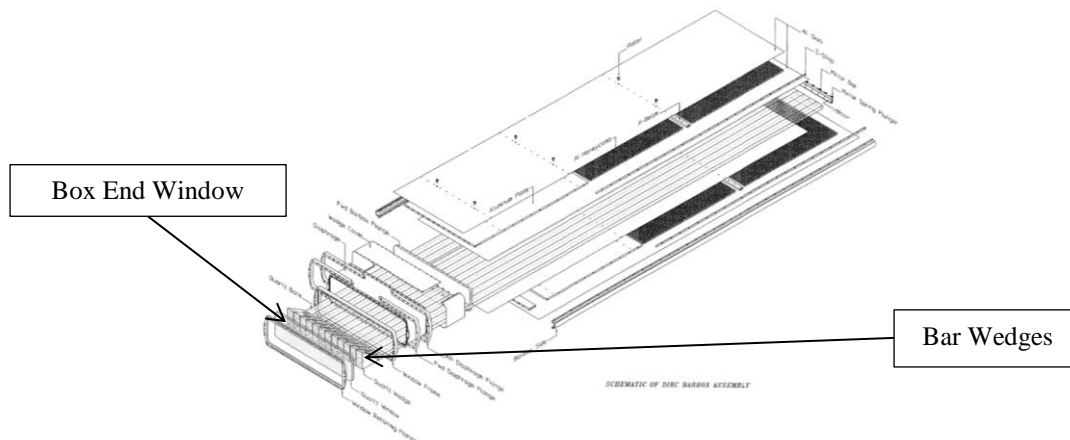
DIRC Bar Box Assembly, showing end window and bar wedges
